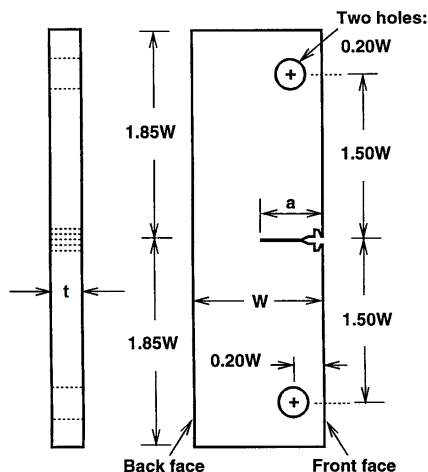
Standard eccentrically-loaded single edge crack tension specimen [39]
